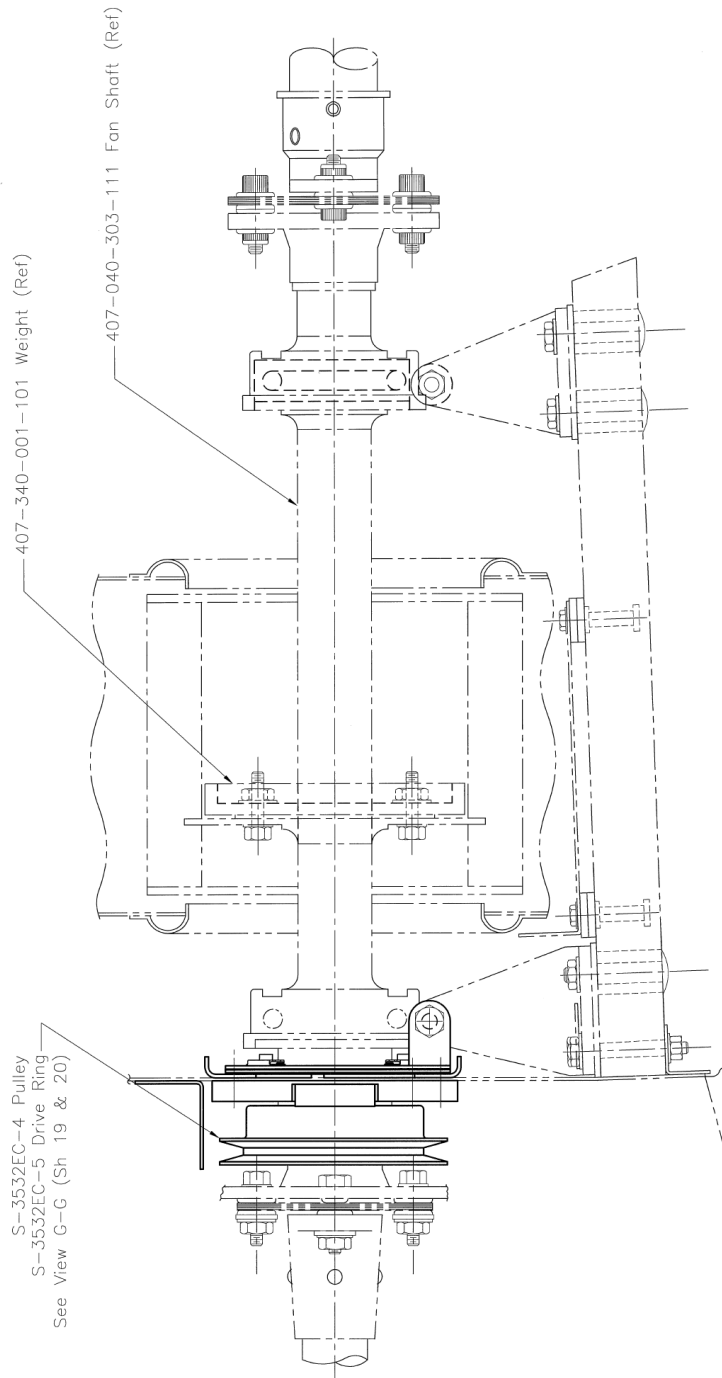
Compressor Drive Pulley Installation – Looking inboard from aircraft left
